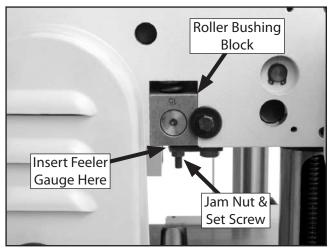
Feeler gauge location for adjusting roller height using wood blocks.
